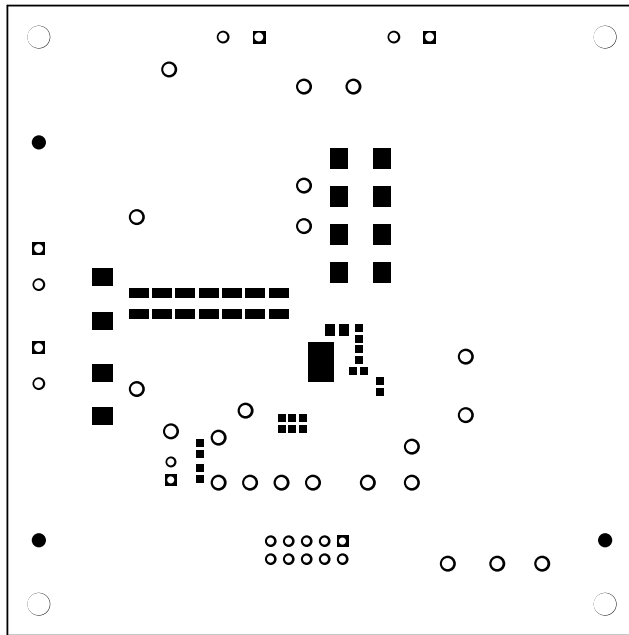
PWR-784EVM Bottom Solder Mask (top view)
